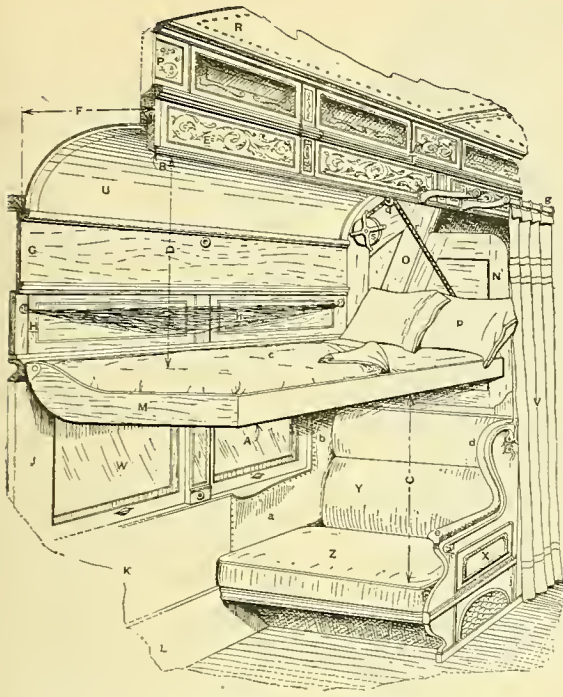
Perspective View of a Sleeping-car Section, showing Upper Berth made up.
